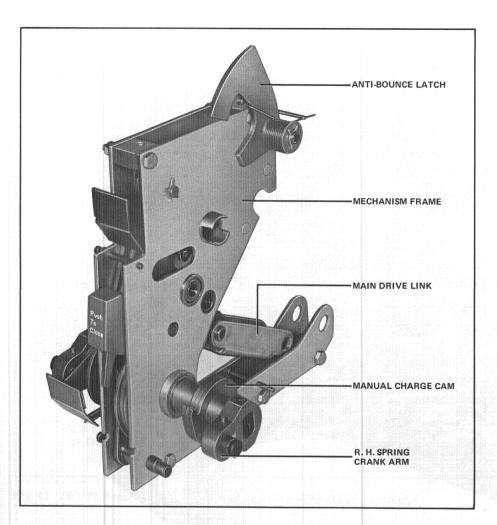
Front View of Mechanism (Manual Spring Charge for DS-206 and DS-416)
